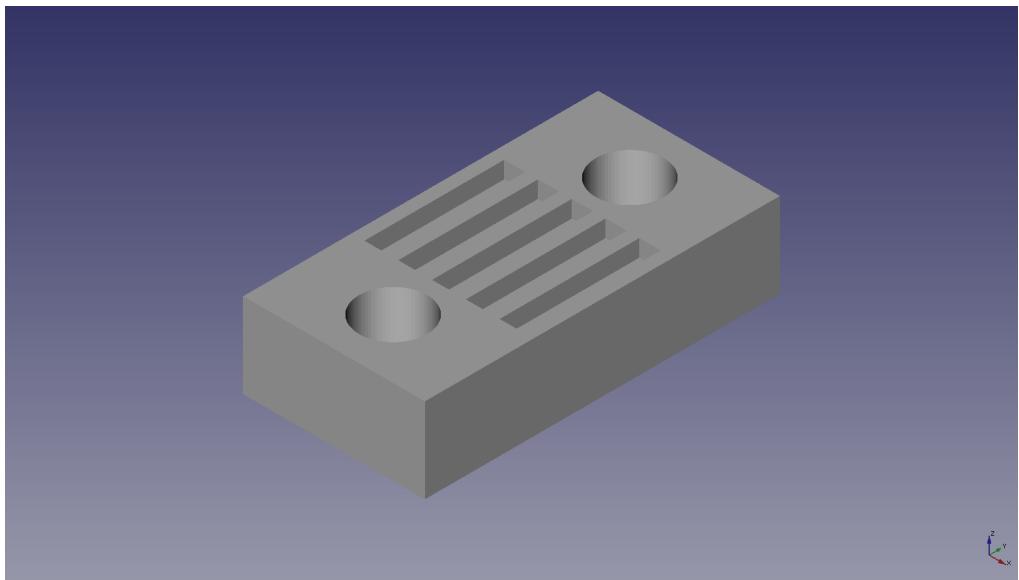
Begonia 3D Printed Belt Clamp Render
